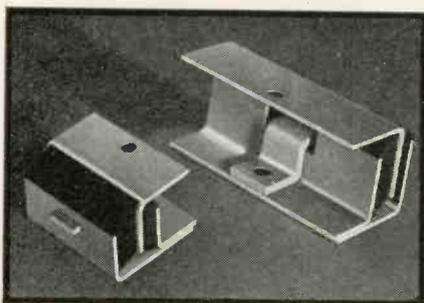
Three-angle-type mounting includes a locking bar projecting through all parts to hold them together in case of damage to the rubber
